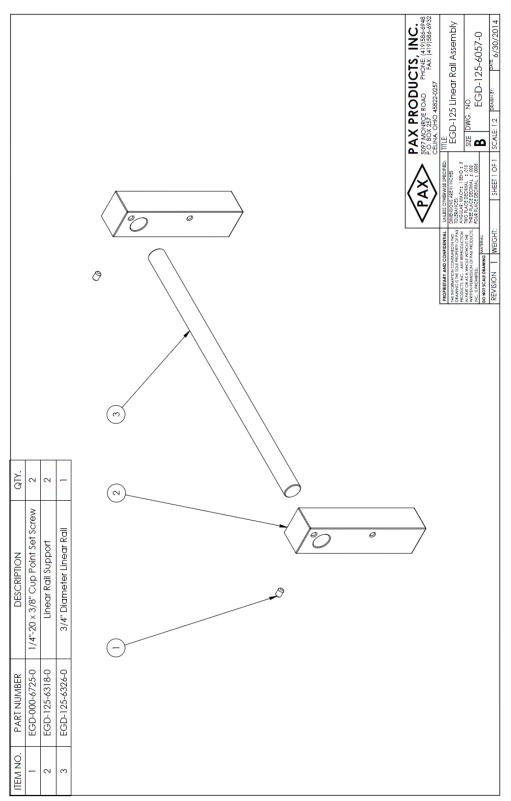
EGD-125 LINEAR RAIL ASSEMBLY
